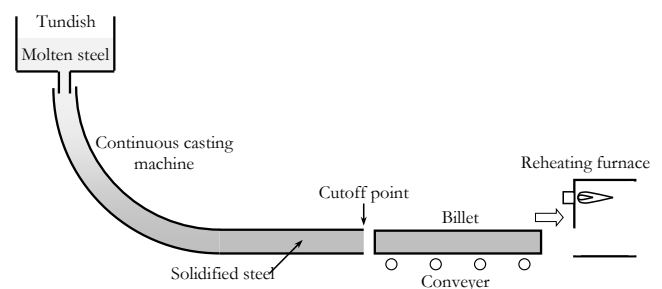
A diagram of a conveyed billet from the continuous casting machine to the reheating furnace.
